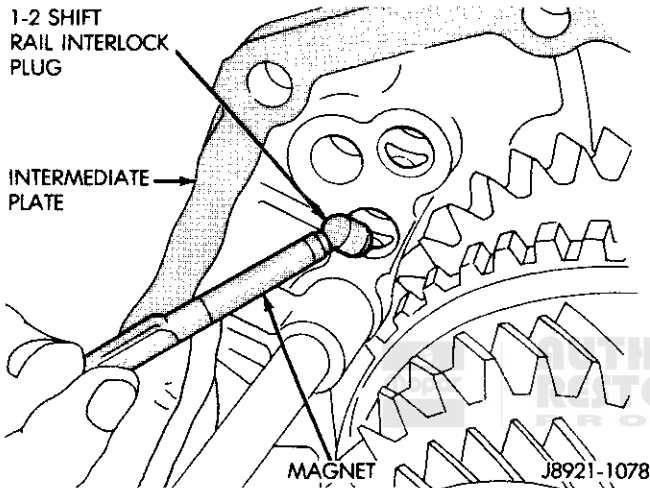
Removing 1-2 Shift Rail Interlock Plug
